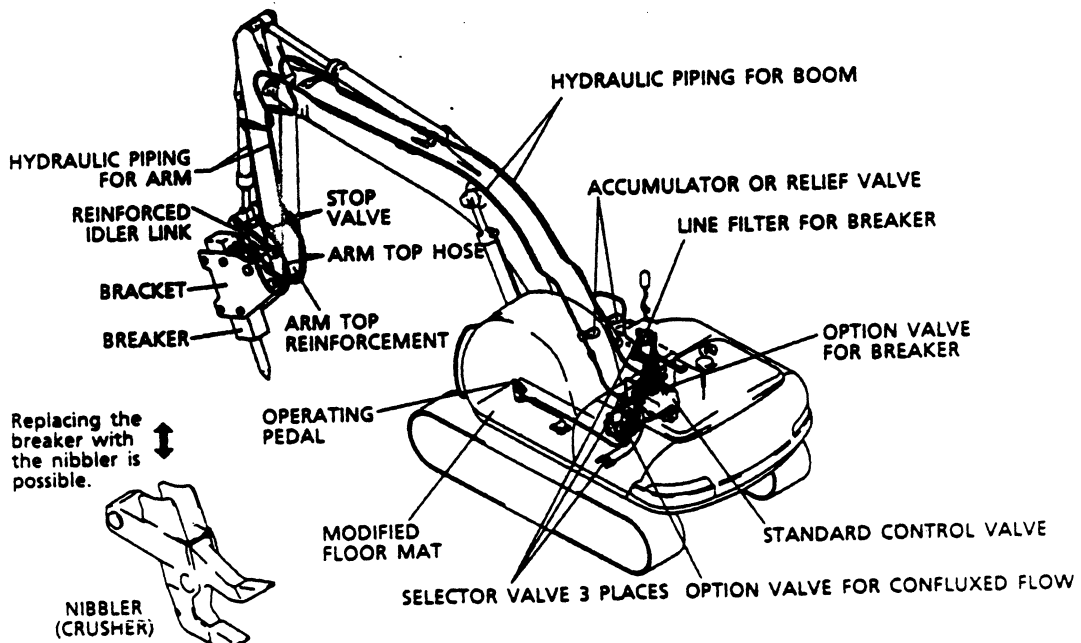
Outside view of Nibbler & Breaker-attached machine
